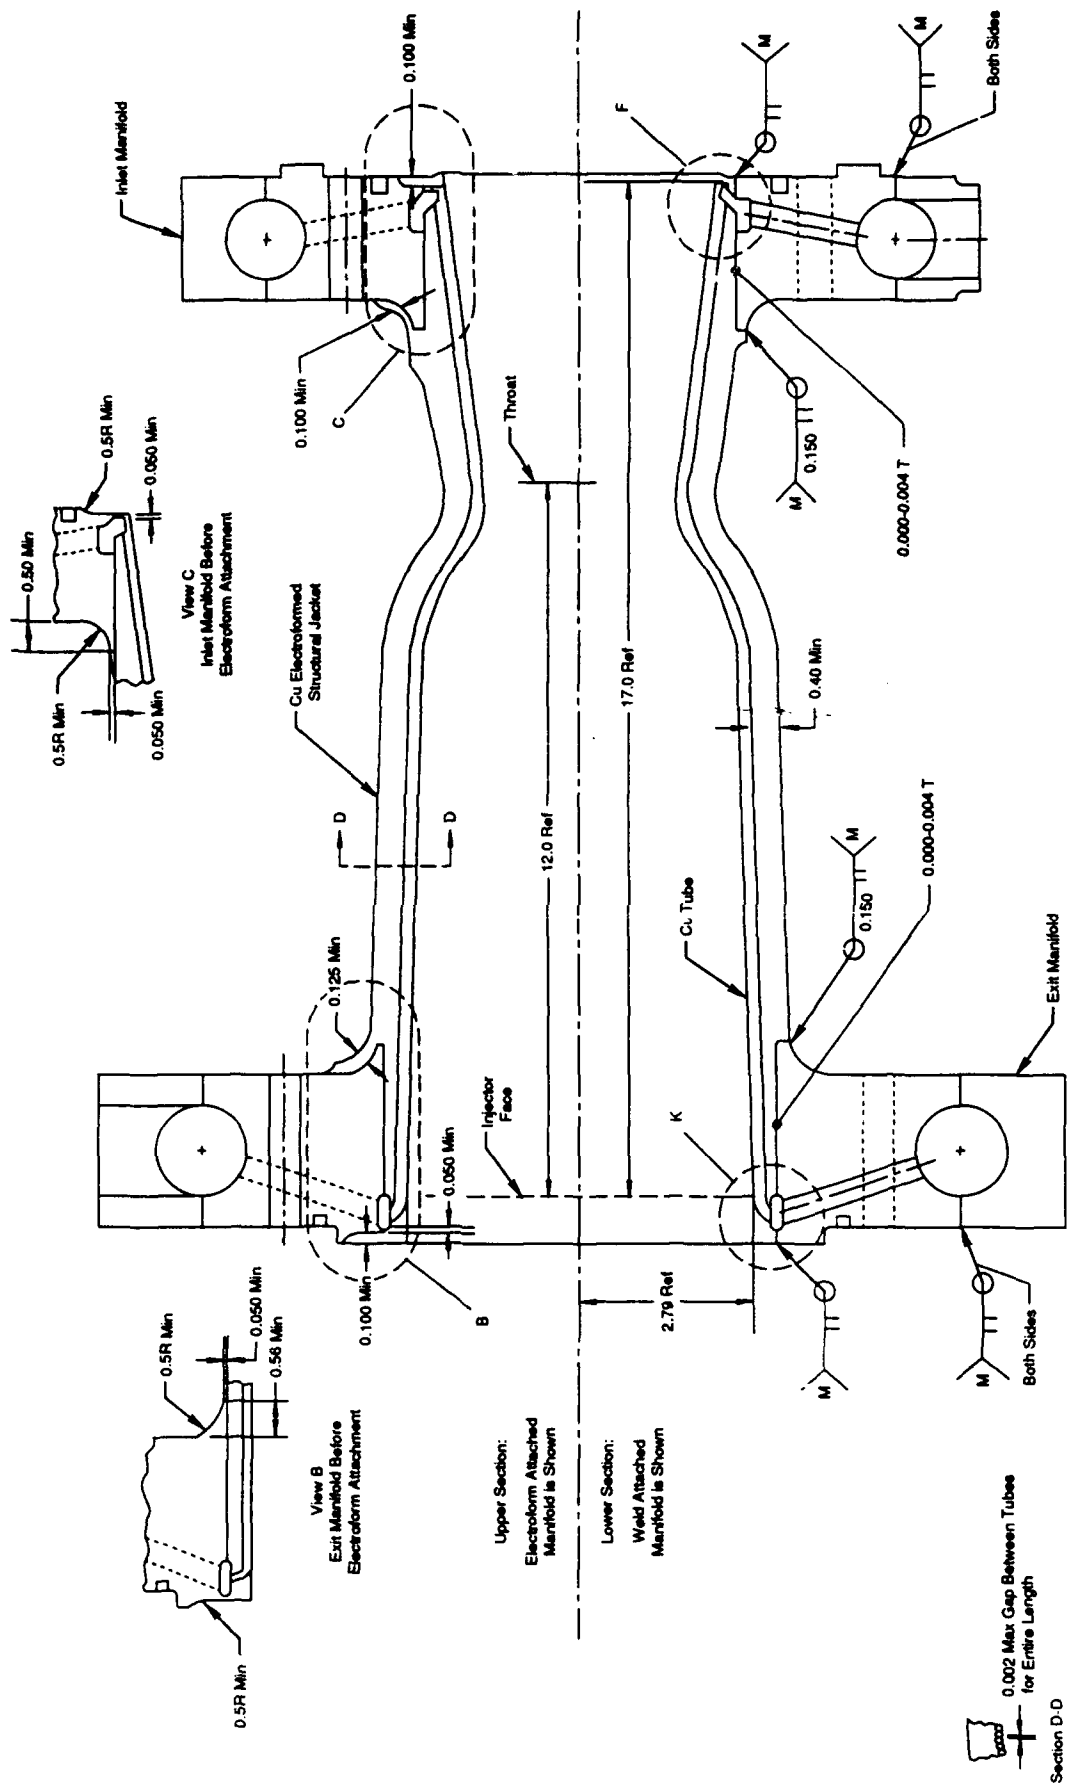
Copper Tubular Combustion Chamber — Advanced Expander Test Bed Alternate Design
